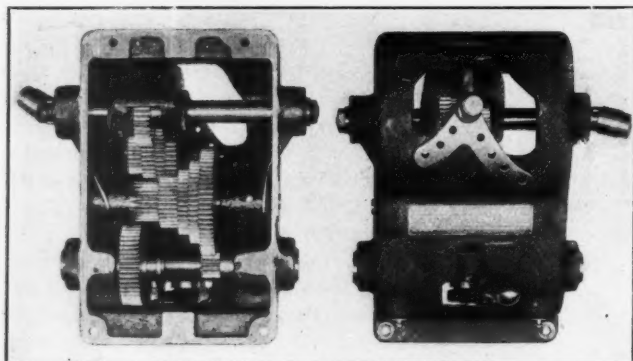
Feed Mechanism of LeBlond Milling Machine
